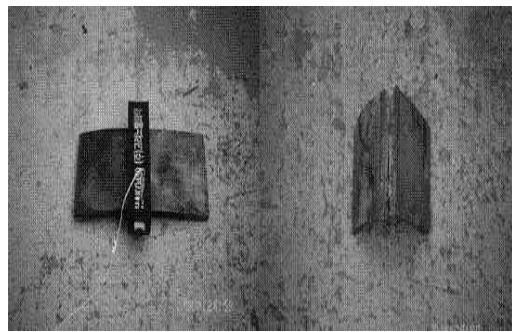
Cut 15mm steel plate (explosive:665g/m)
